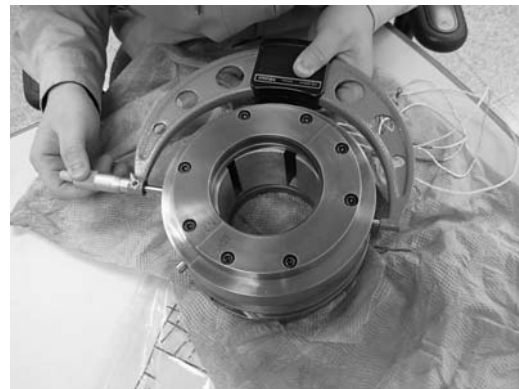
5-pads LBP tilting-pads bearing used for installation and run
